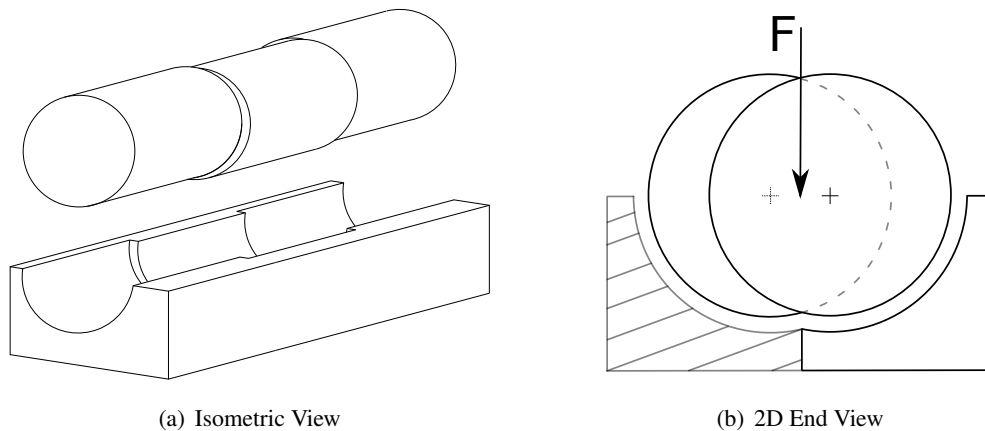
Isometric and End View Sketch of a 3-Segment Full Offset Bearing
